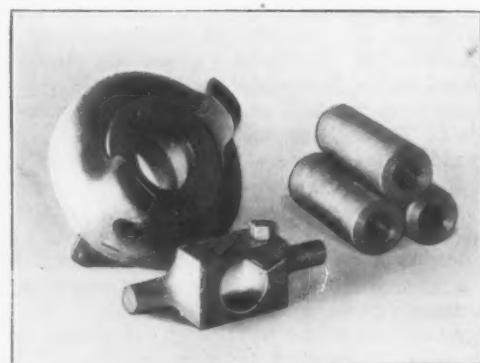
Parts Used in Boring the Reverse End of the Shells.
